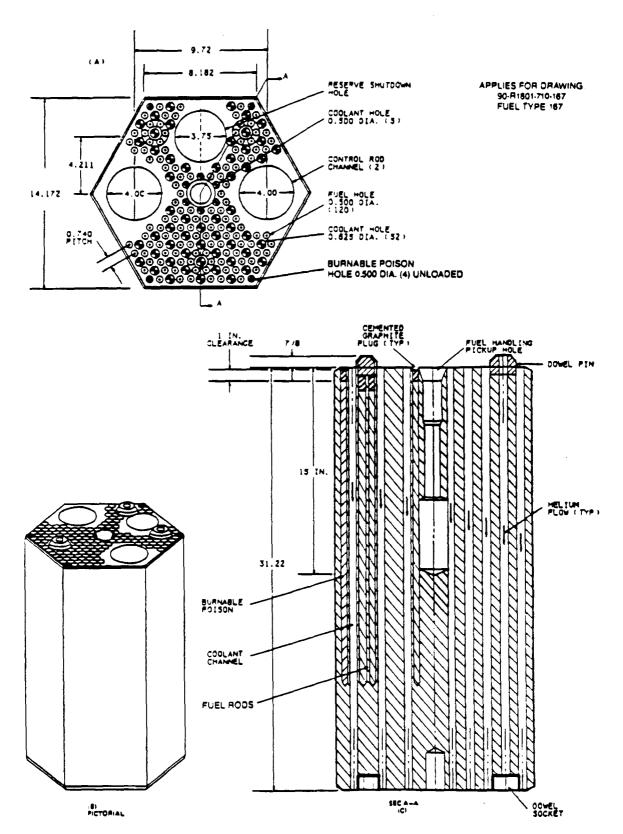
C.10. Bottom control fuel element with enlarged pickup hole.
